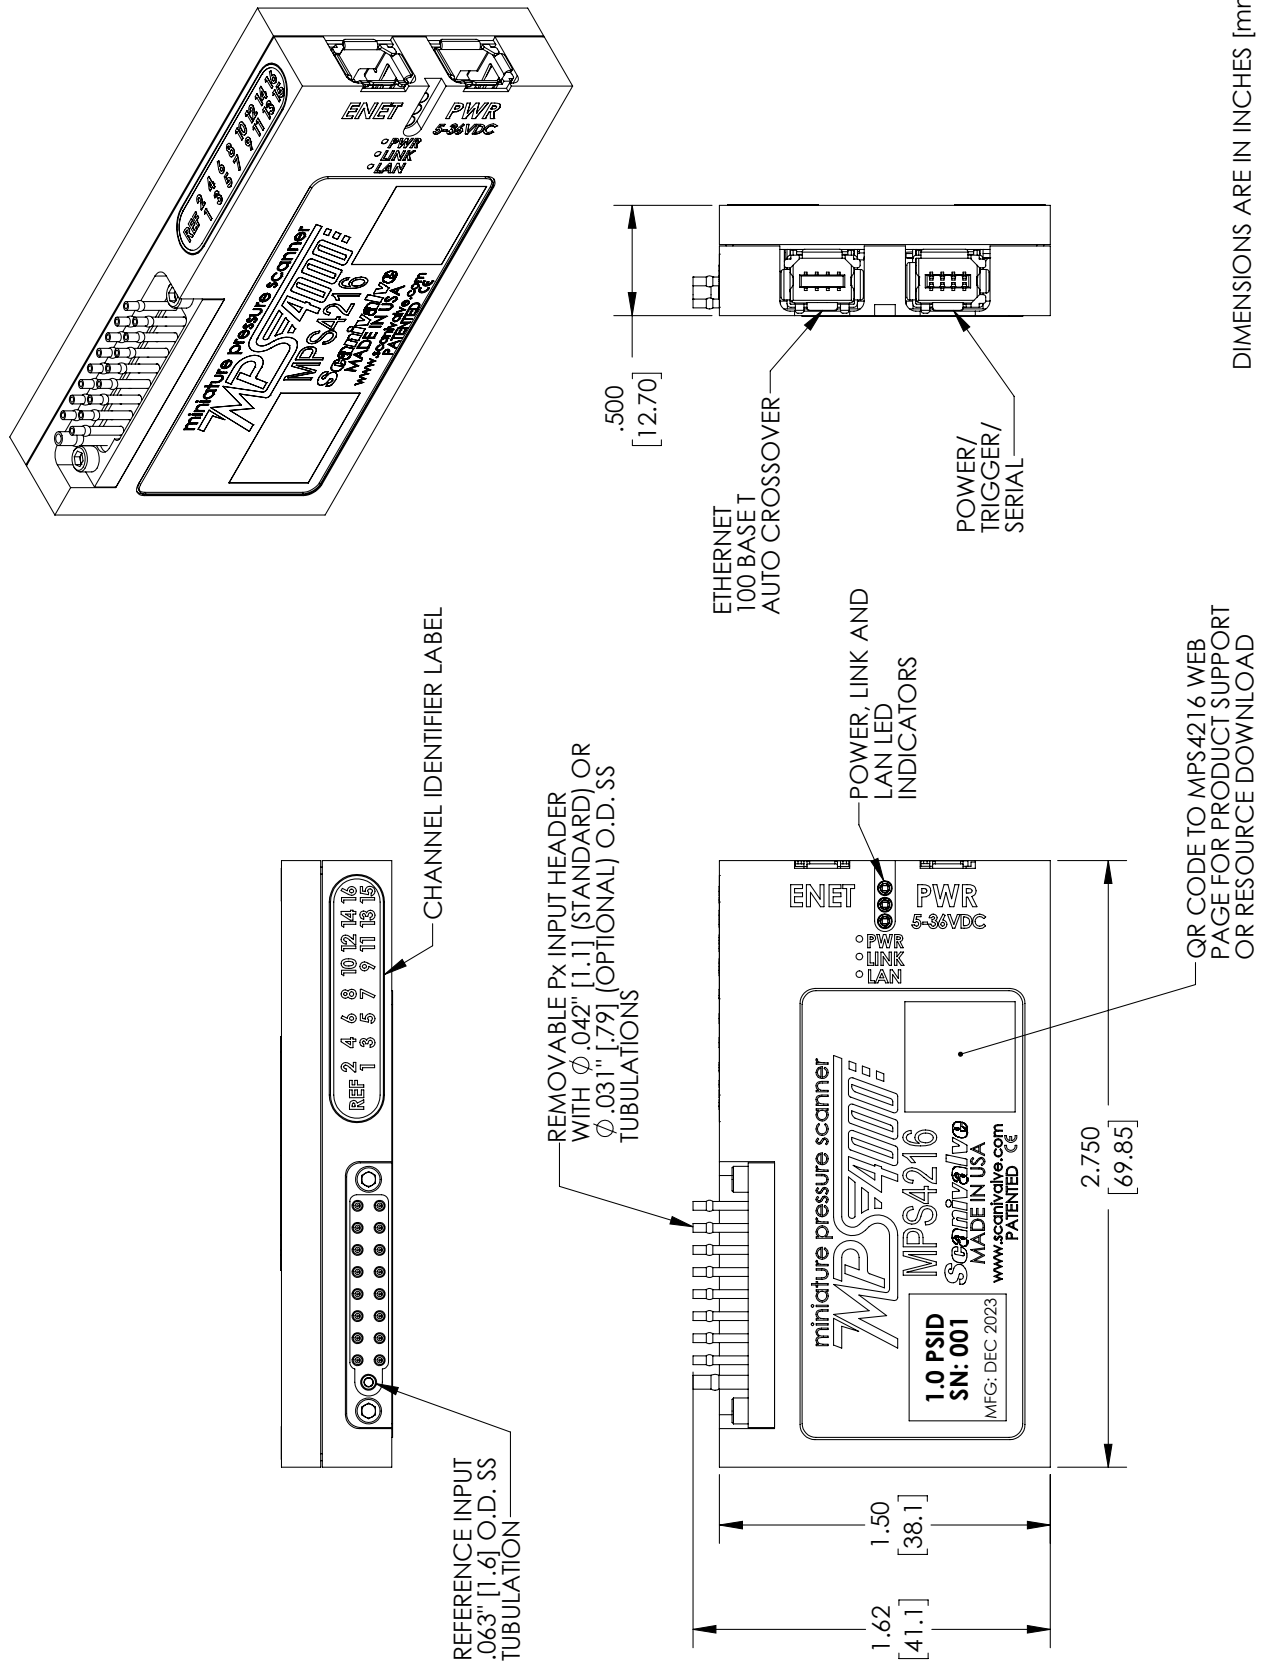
MPS4216 DIMENSIONAL DRAWING
